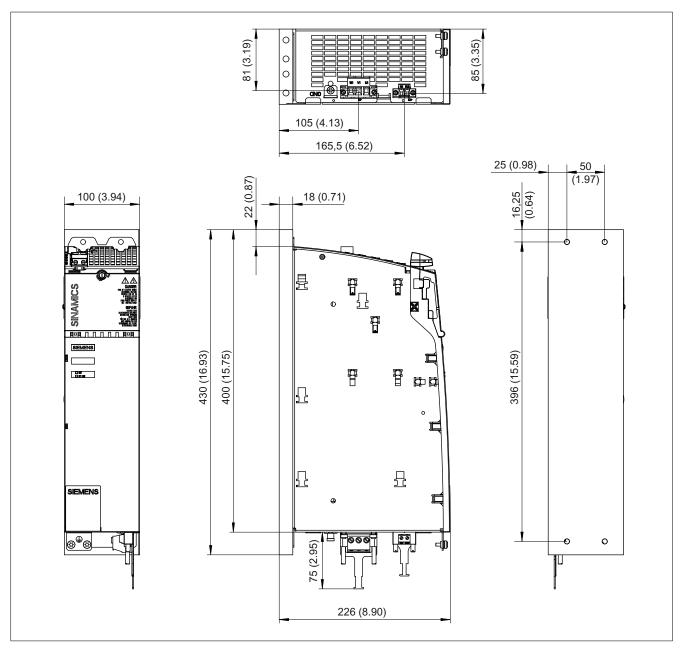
Dimension drawing of 20 kW Basic Line Module with cold plate, all dimensions in mm and (inches)
